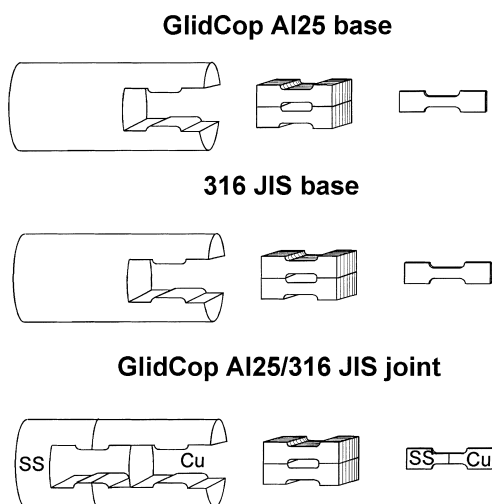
Scheme of specimen cutting from blanks of the base alloys DS copper (GlidCopAl25) and type 316 (JIS) stainless steel and from the joint GlidCopAl25/316 JIS made by friction welding method.
